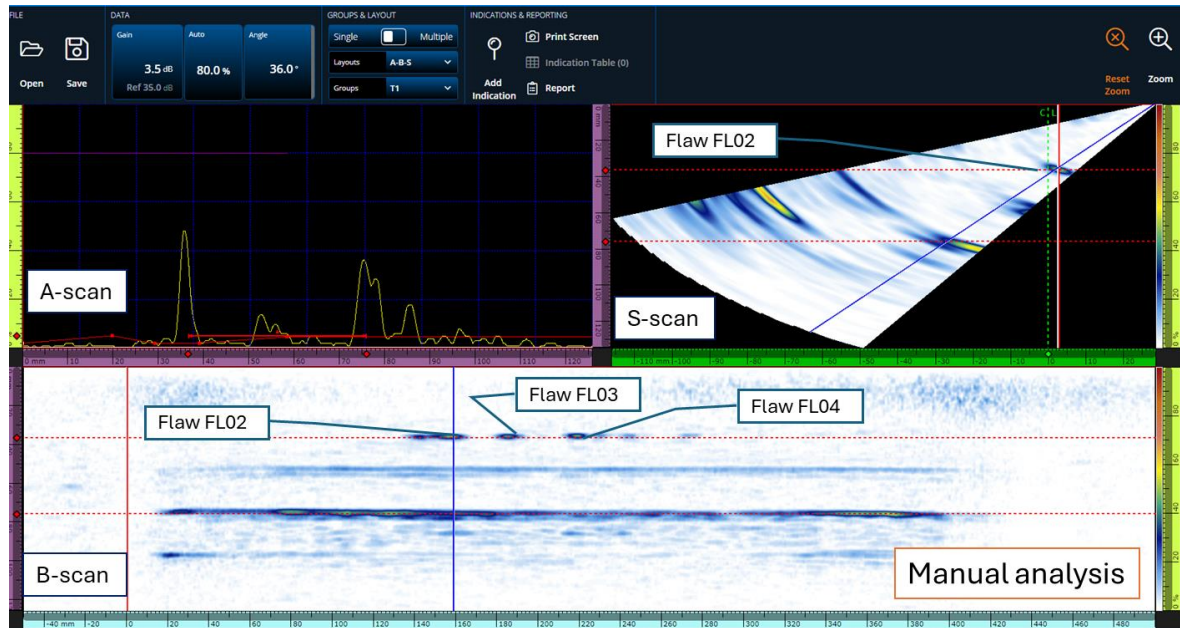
PAUT inspection of a weld indicating presence of three flaws
